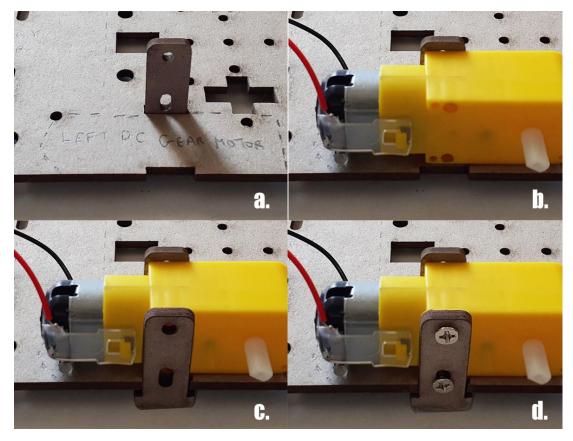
Assembling the DC gear motor by using fasteners, screws and nuts.
